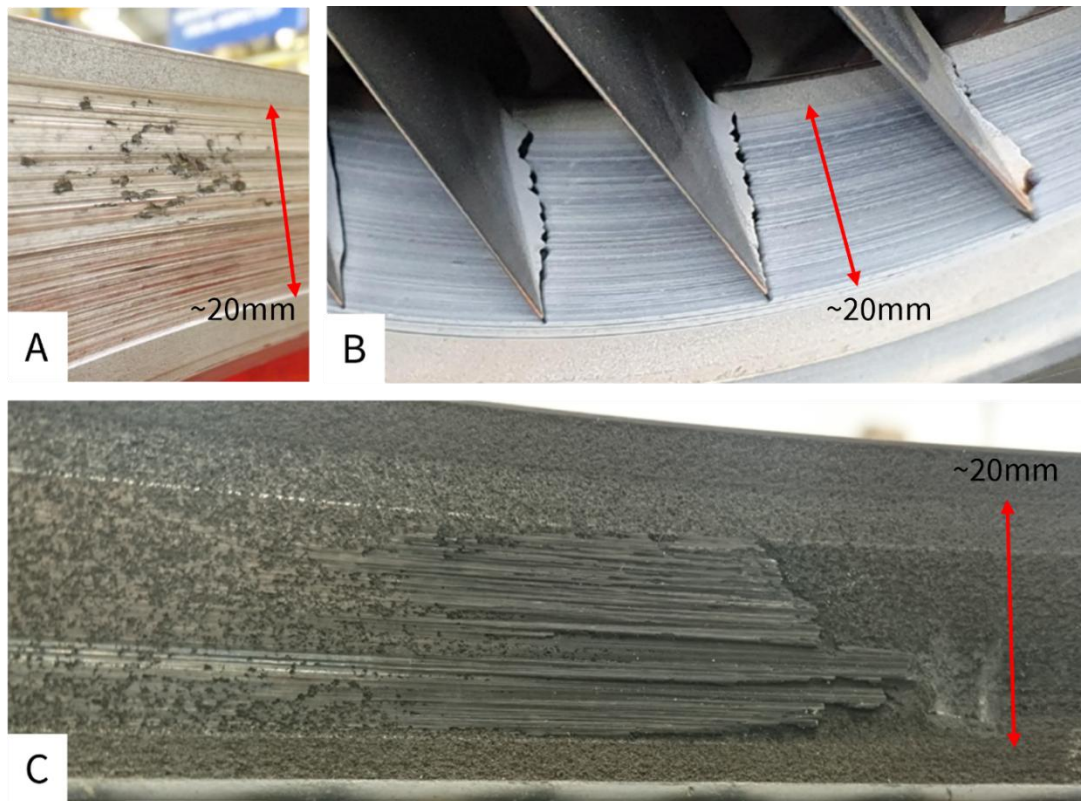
Examples of poor abradable performance within an engine. A – Pitting on the abradable surface. B – Adhesive pickup on the blades. C – Smearing on the abradable surface
